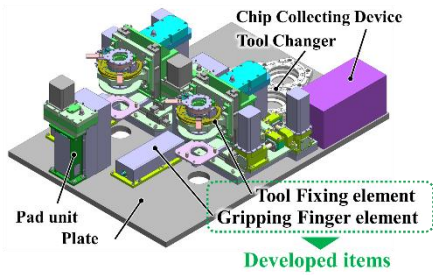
The Tool Base design result and the two technical challenges presented in the paper
